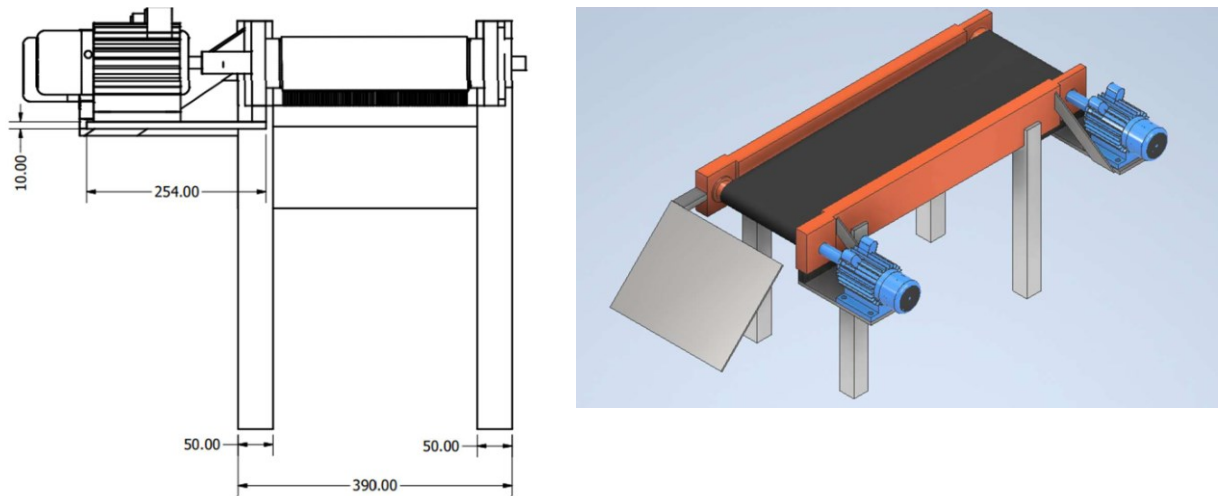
(a) The drawing, and (b) the CAD with an isometric view of the designed prototype
